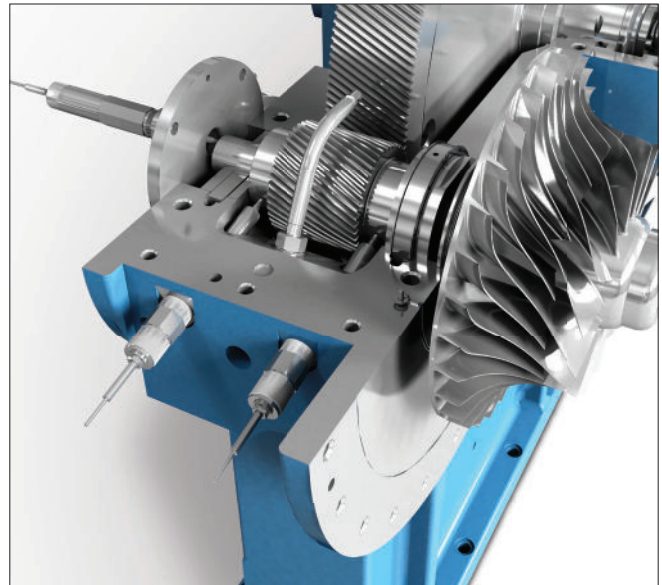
Traditional axial displacement probe displayed sensing shaft end position on a single-stage rotor assembly.
